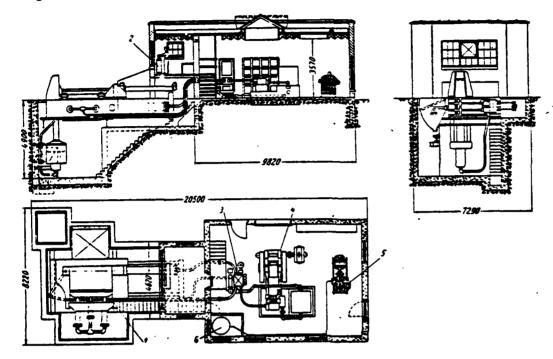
The general view of the installation/setting up of baling machine with three steps/stages of the extrusion/pressing: 1 - press; 2 - control panel; 3 - valve distributor; 4 - pump; 5 - compressor; 6 - air collector.
